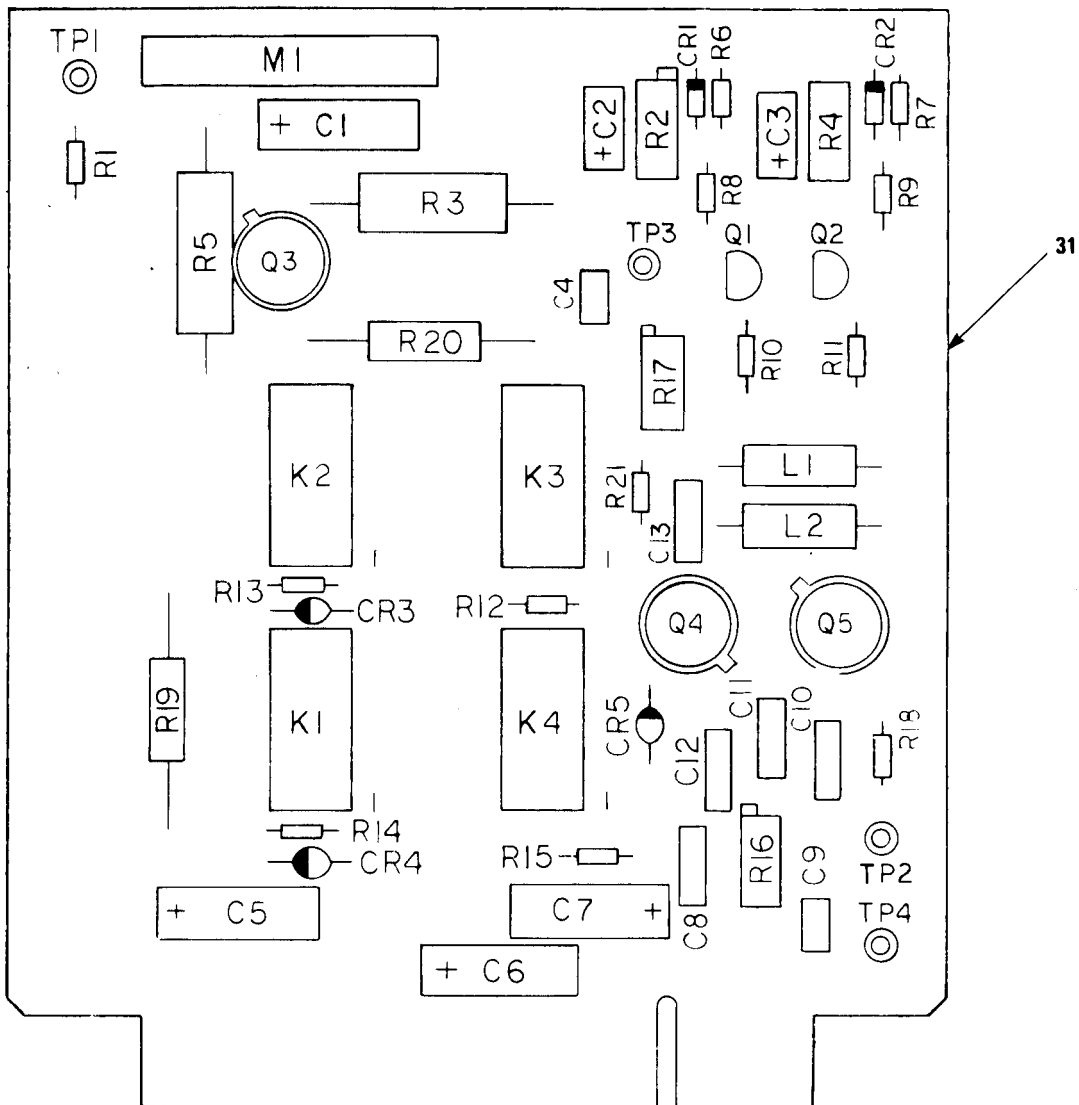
Bias Oscillator and Meter Drivers Assembly
